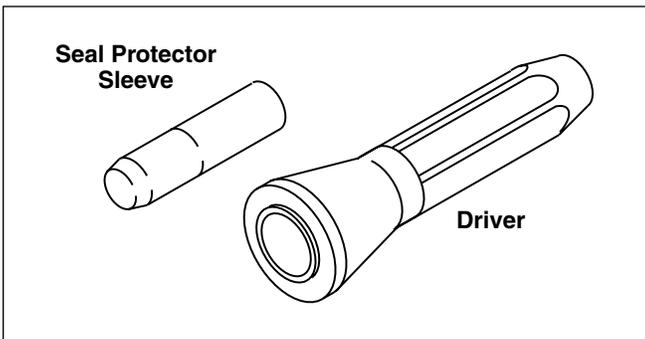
Main Drive Gear Small Oil Seal Installer (Part No. HD-41405)
